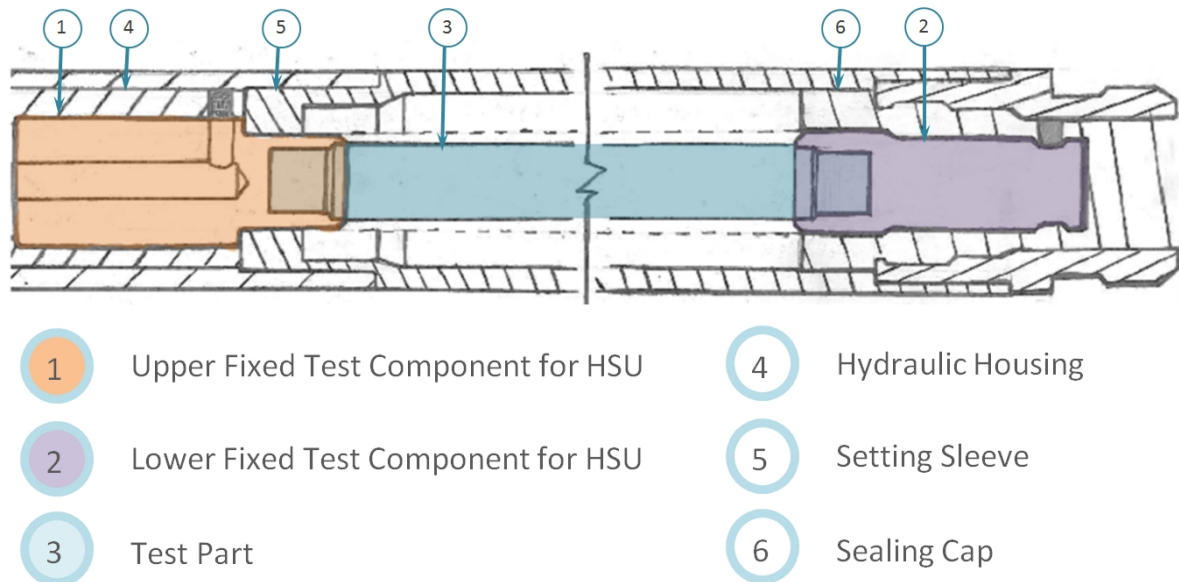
Assembly of Buckling Test Equipment for HSU
